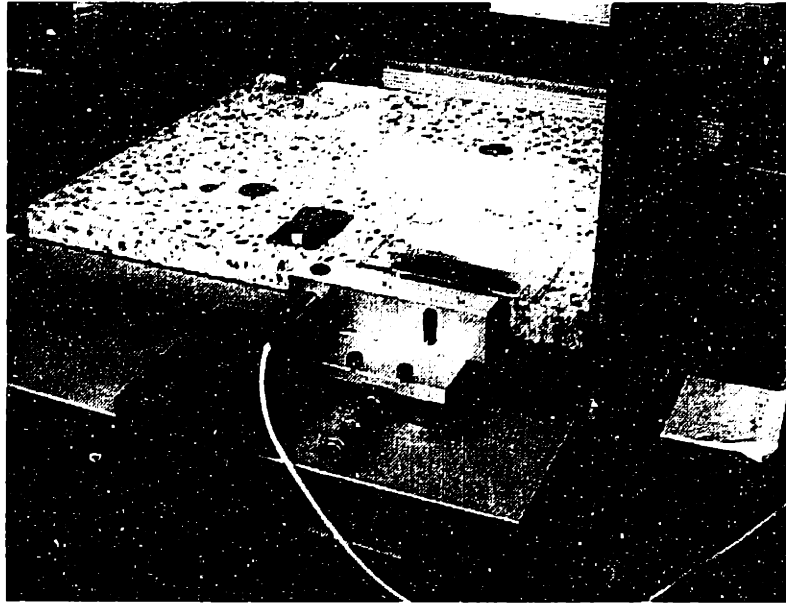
Test fixture for measuring repeatability of kinematically fixtured film.
